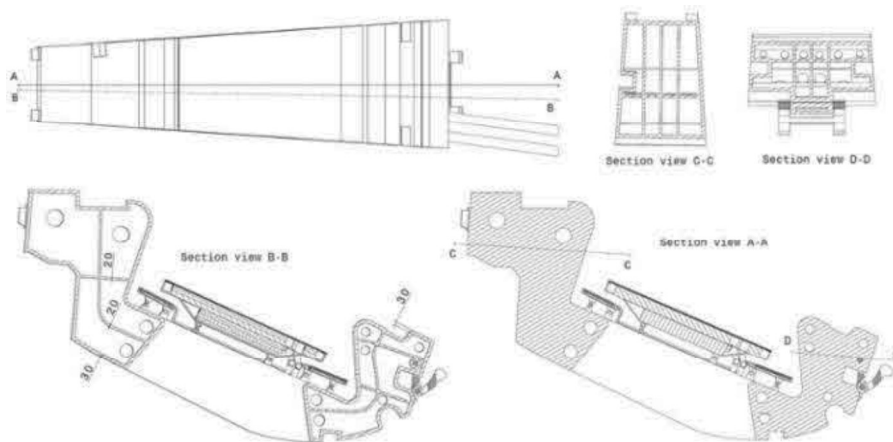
Technical drawings showing the cut views of a cassette body with shielding liner and reflectors.
